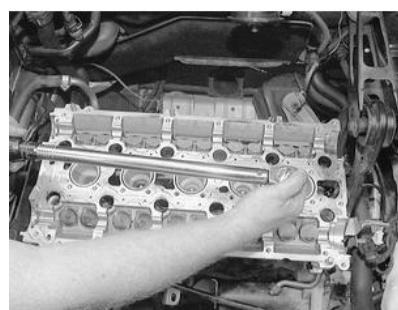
A torque angle gauge can be helpful when angle-tightening the head bolts
